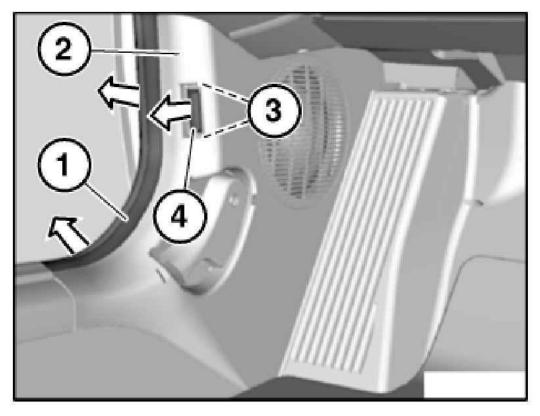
Pressing Retaining Lugs Courtesy of BMW OF NORTH AMERICA, INC.
